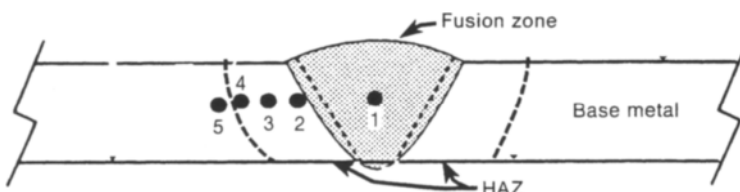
Butt weld, showing fusion zone and HAZ. See text for explanation of numbered points.
